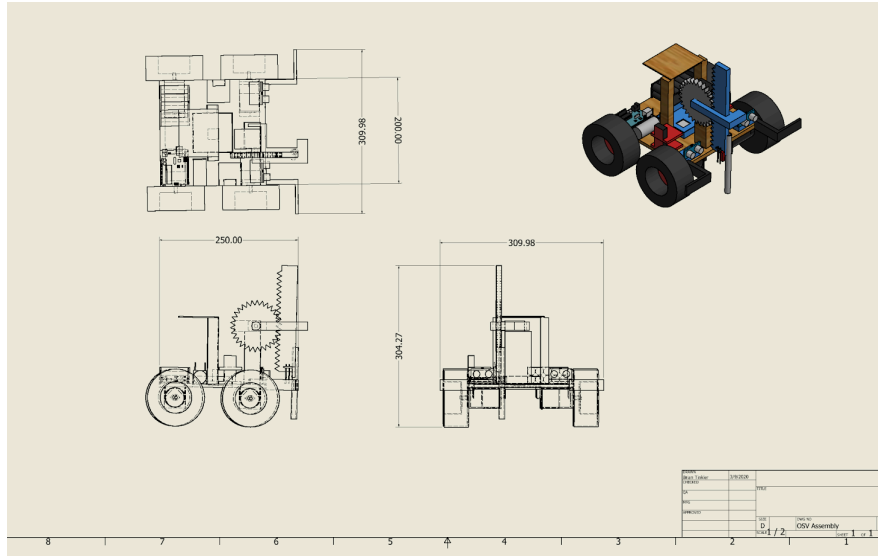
The 4-view engineering drawing above displays the overall dimensions of the OSV.
